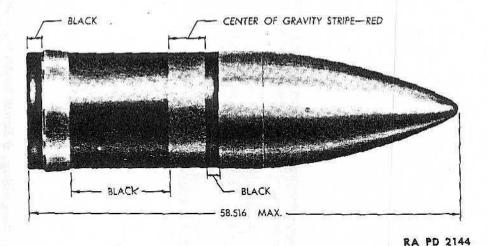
Projectile, Dummy, 2100-lb., M3, 16-in. Gun or How.
